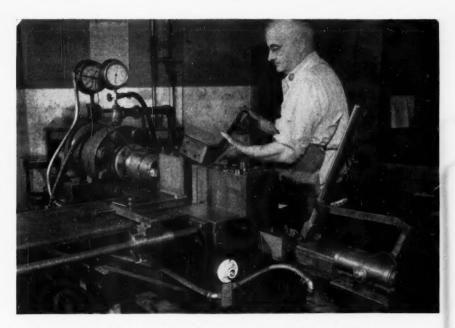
Removing α formed bus bar from the die in which it has been shaped in an hydraulic press. The preselective pointer is shown on the pressure gauge located at the rear. (Illustration Courtesy General Electric Company)
